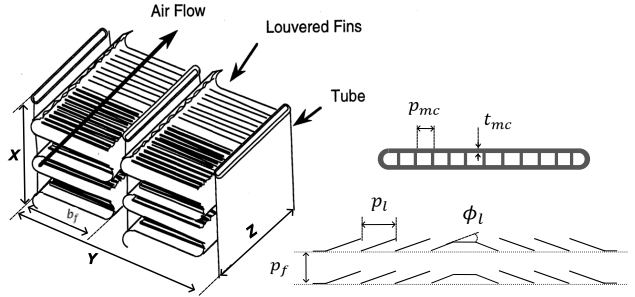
Condenser core geometry: Flat tube microchannels with louvered fins.
